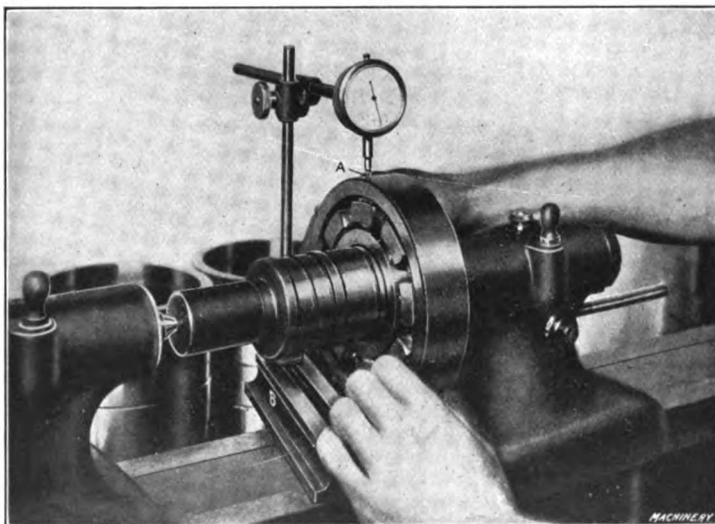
Testing Concentricity of Roller Bearing, with Dial Test Indicator
